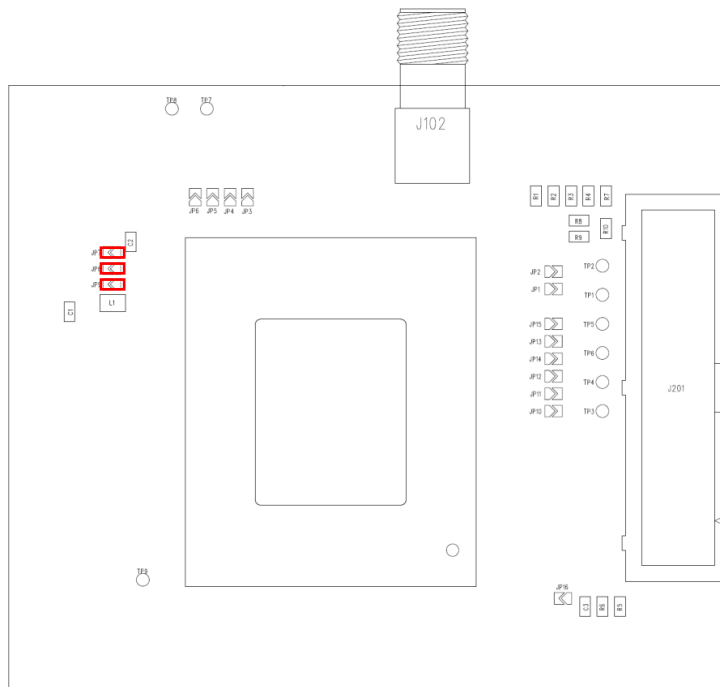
Default Soldering Configuration for Jumpers (Socket-Up Board)
